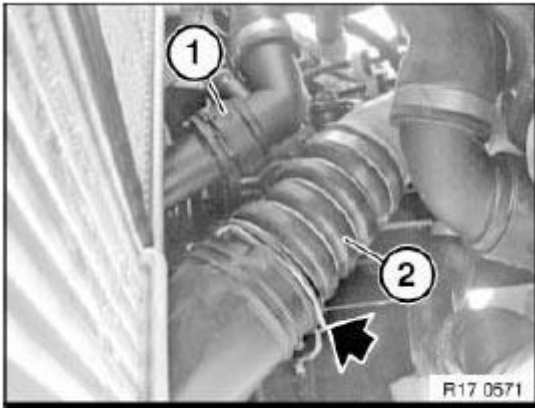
Locating Coolant Hose And Charge-Air Duct From Intercooler
